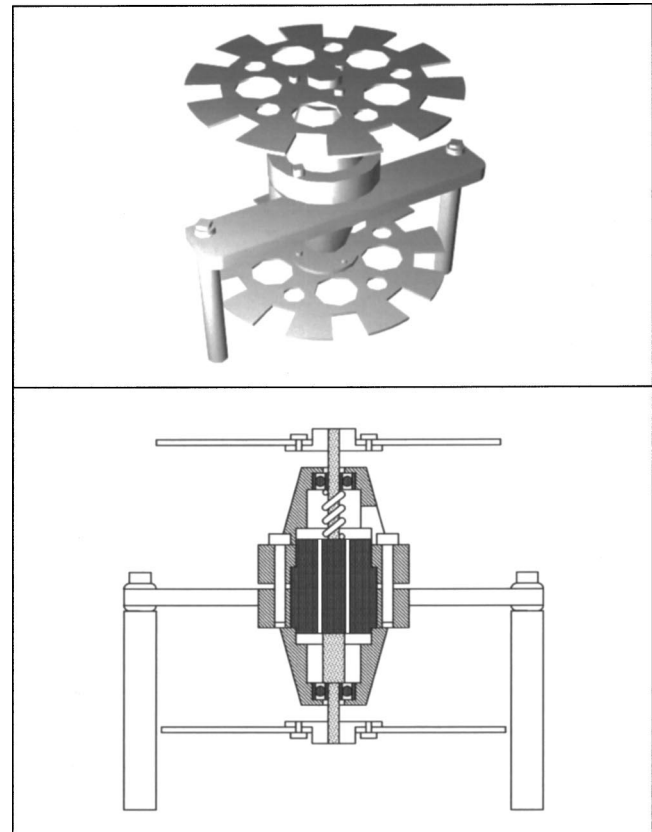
Schematic of prototype velocity selector construction: (a) Three-dimensional view, and (b) cut-away view showing the bearing support. Not shown is the water-cooled aluminum block clamped to the assembly.
